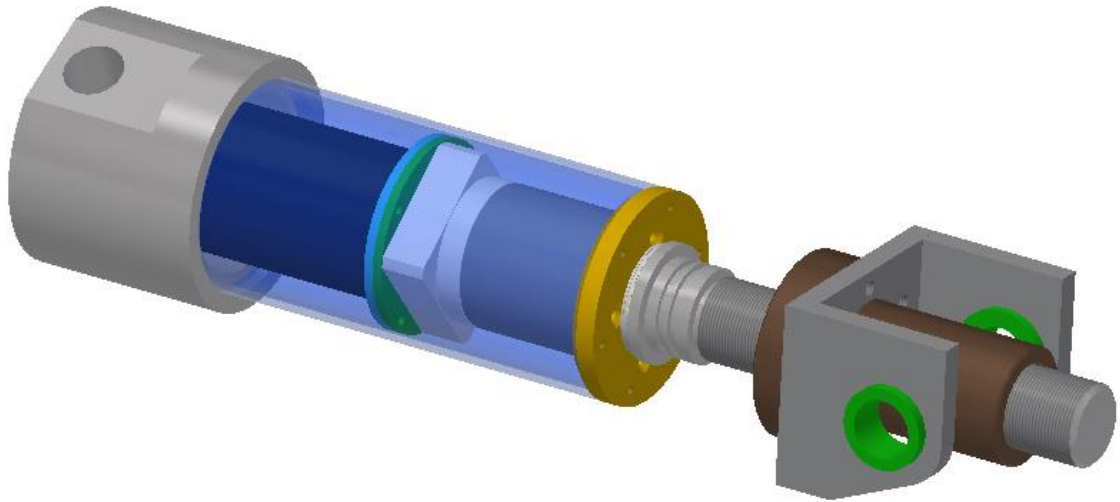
Final design of the whole mechanism, already with the joints and supports of the main components and intrusion protection where necessary
